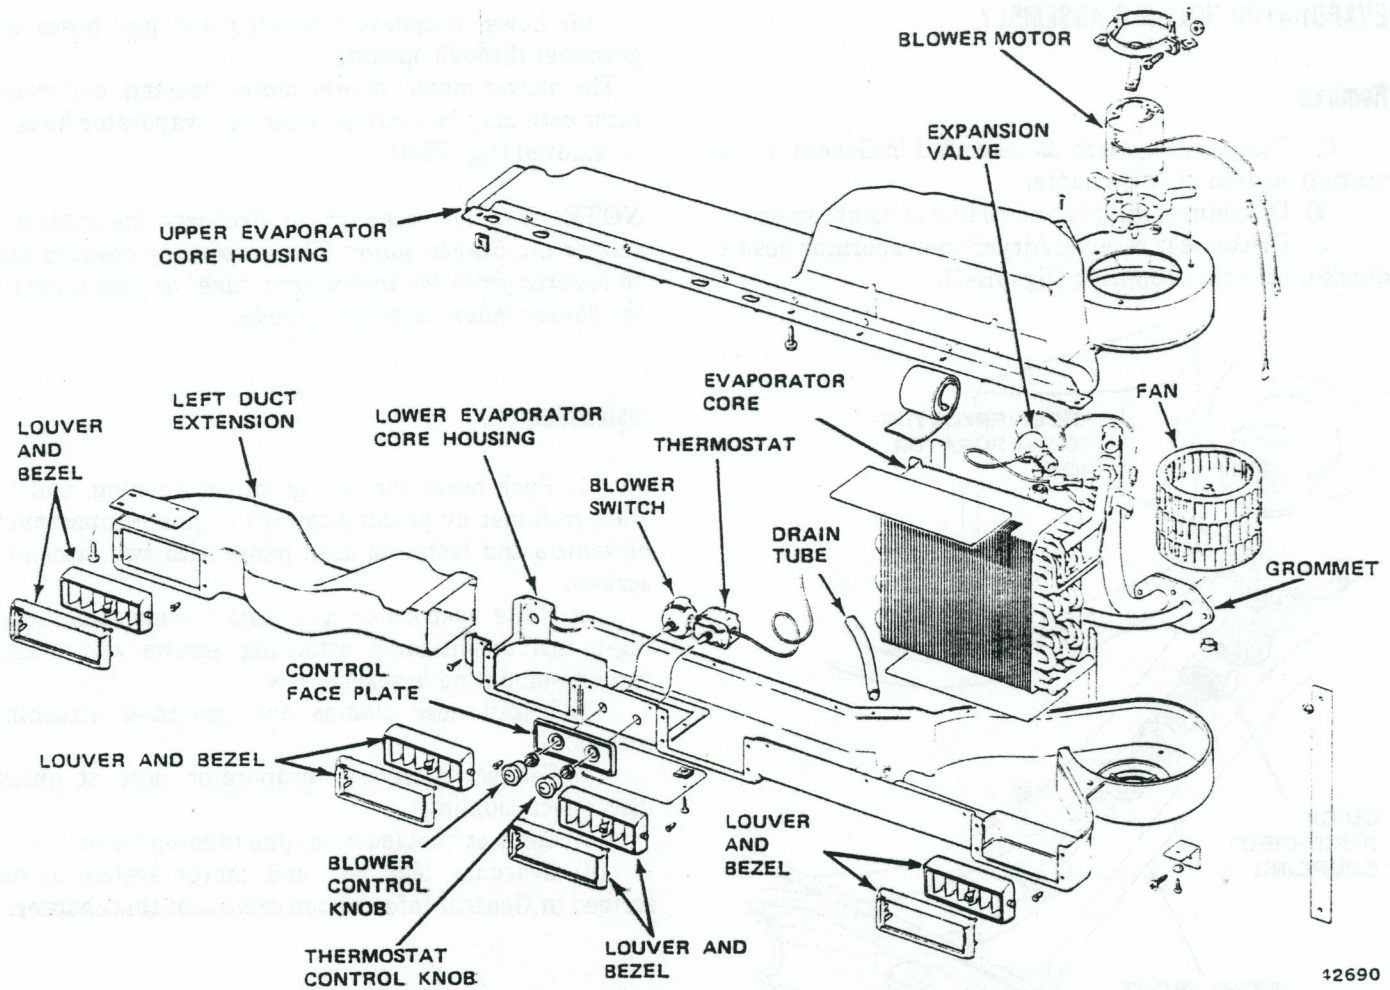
E-9 Evaporator Housing Assembly—Cherokee-Wagoneer-Truck Models
